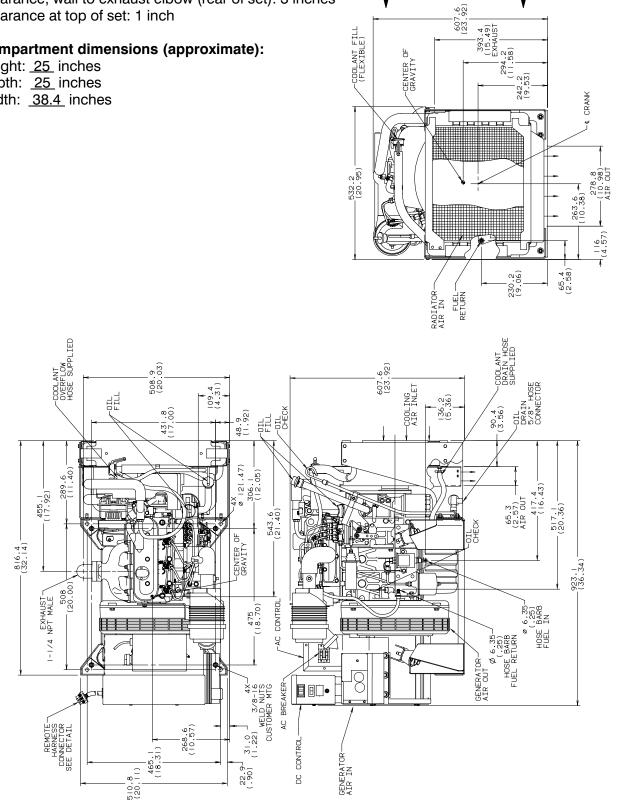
HDKAL/HDKAQ/HDKAR MOUNTING DIMENSIONS (from 500-3098)
